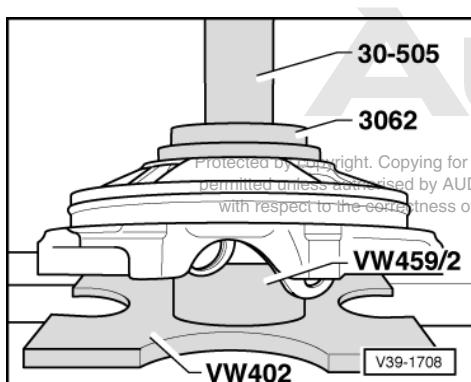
> Driving outer race for taper roller bearing, small into gearbox housing
